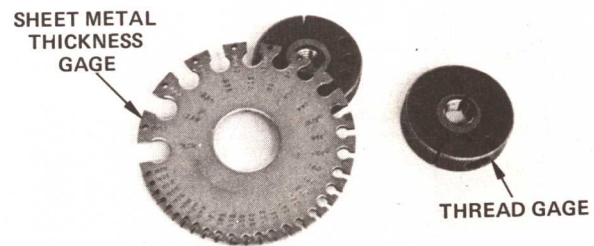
Modern day gages are used to check the accuracy of materials and machined parts.
